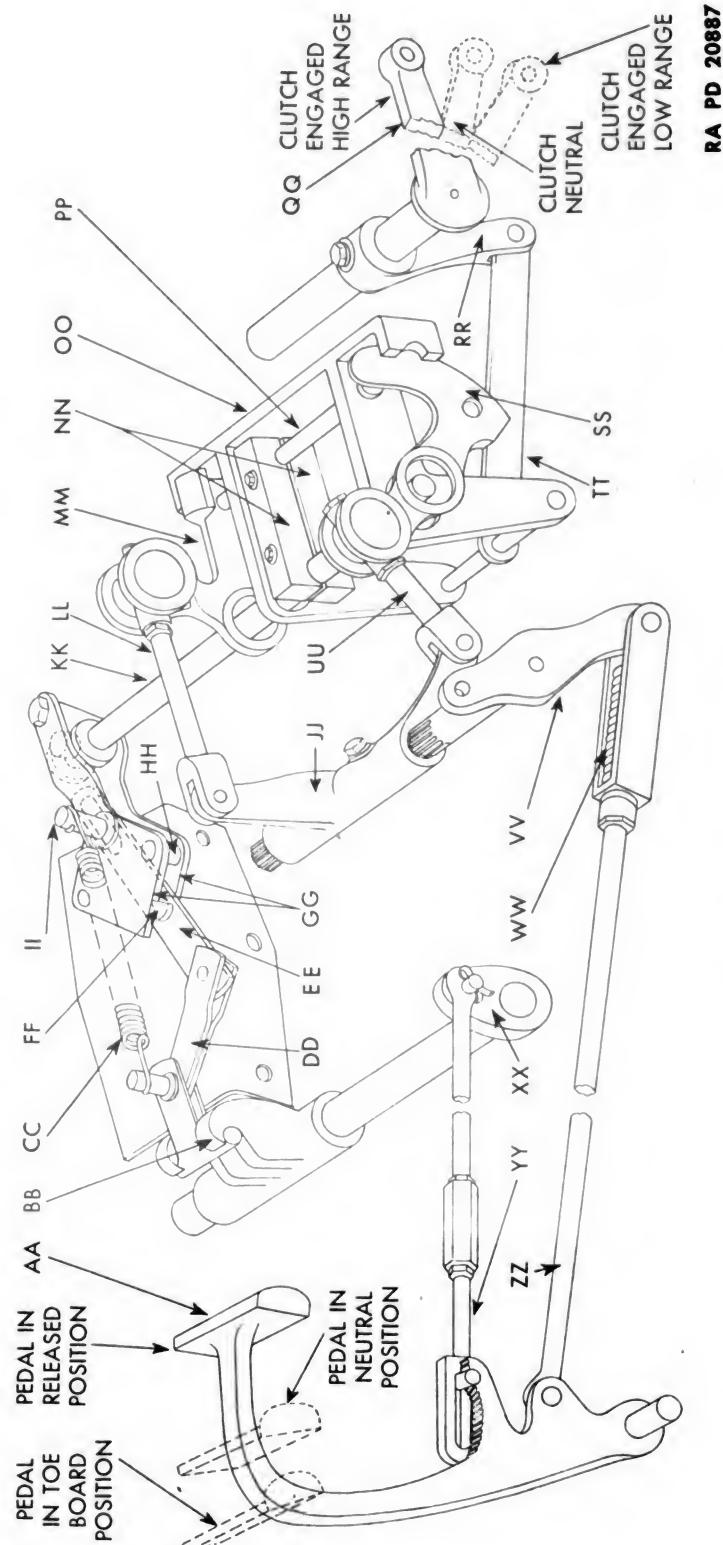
Schematic Drawing of Clutch Selector — Clutch Engaged
